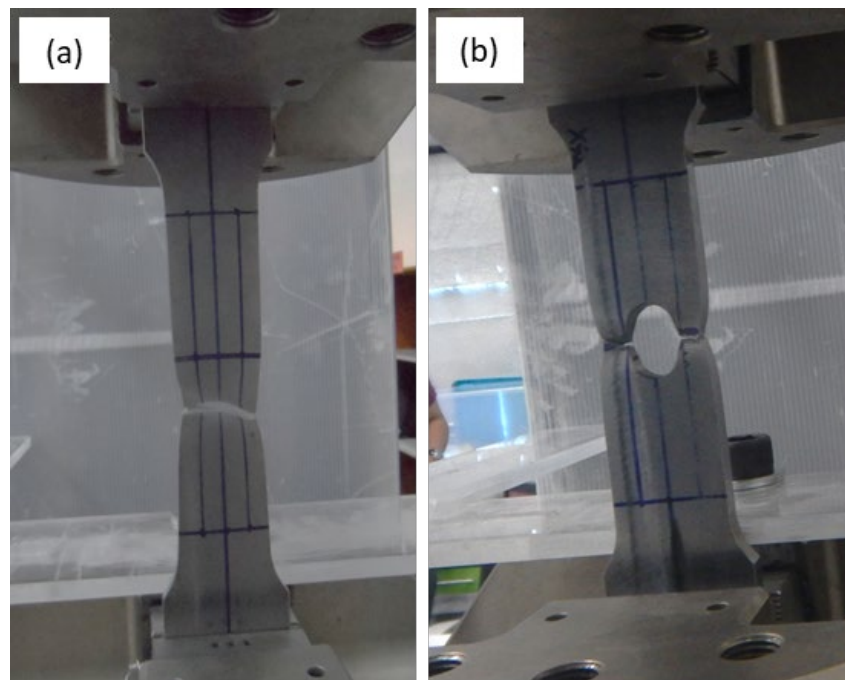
Fractured photo of (a) non-defective and (b) defective specimen
